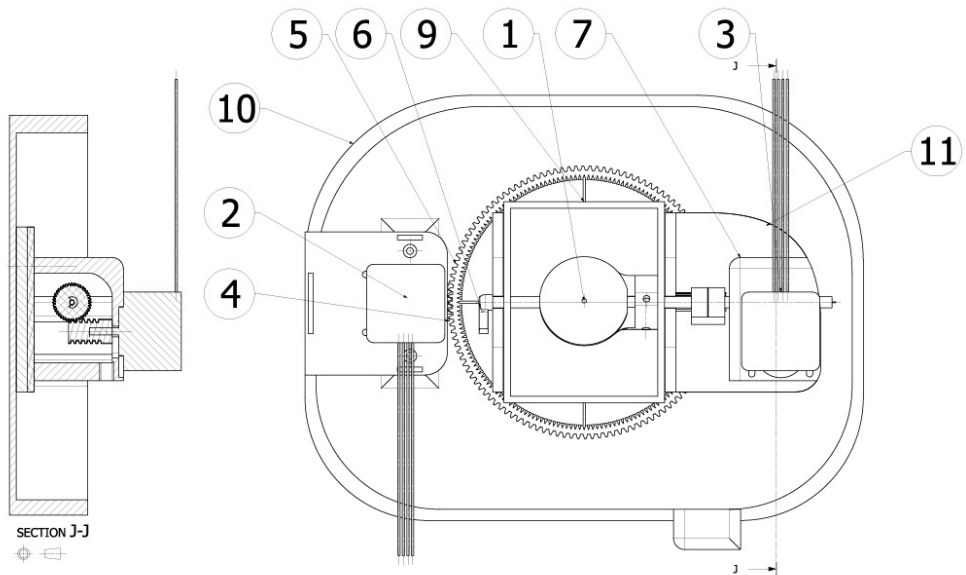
The figure on the left shows the top view of the plant and on the right a side view showing the cutting G is depicted. 1-Sample platform, 2-Rotation engine, 3-Angular engine, 4-Rotation power gear, 5-Rotation gear, 6-Shaft, 7-Gearbox, 9-Inner container, 10-Ice container, 11-Structural support.
